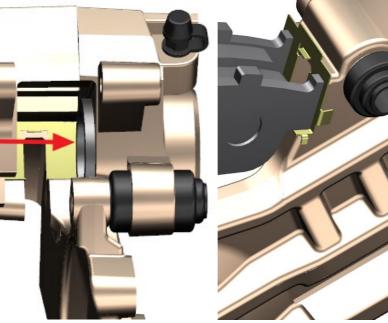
Rear wheel, swinging arm assembly		Change rear brake arresters	CHK
